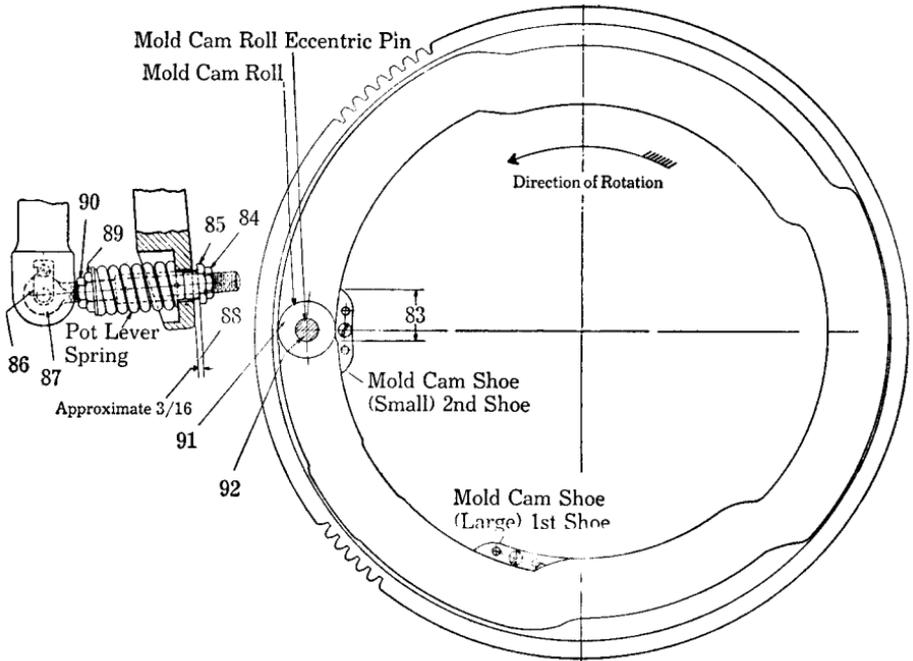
View of the mold cam and driving gear when standing at right-hand side of machine, showing the mold cam roll and eccentric pin. The eccentric pin and roll are part of the solid type of mold cam lever and the eccentric pin is used to make the adjustment for the proper clearance between face of mold and matrices when justification takes place.
